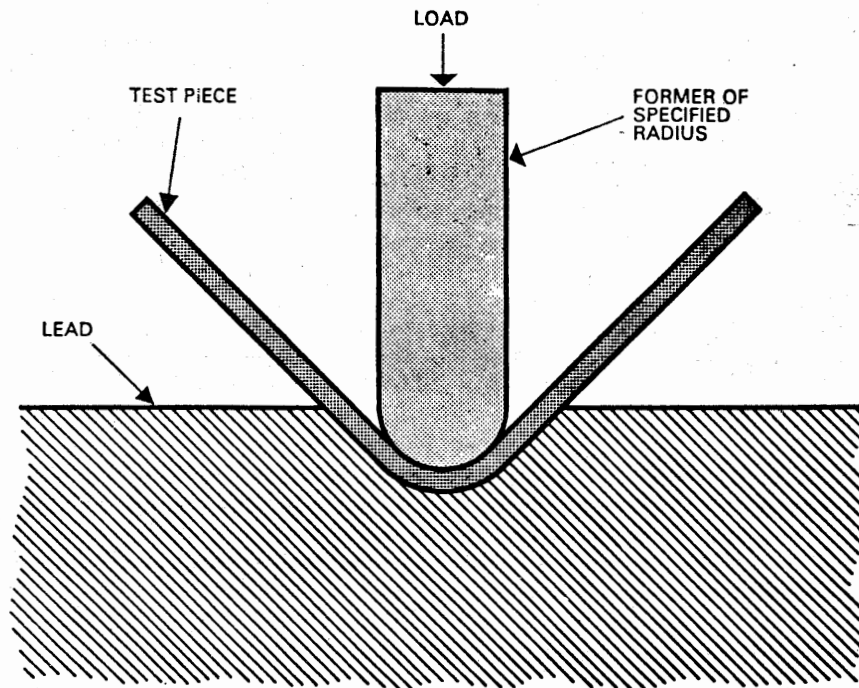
FORMING BEND TEST PIECE WITH LEAD BLOCK AND FORMER
